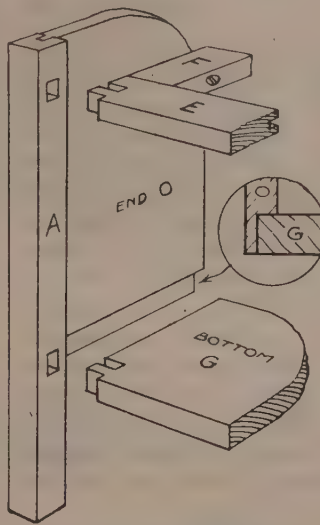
SHOWING METHOD OF CONSTRUCTION.
